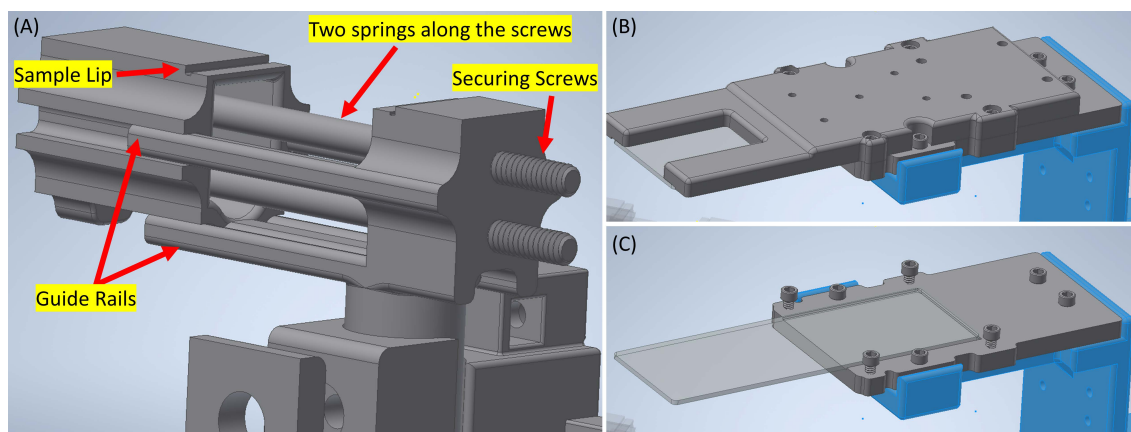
(A) The CAD of the final version of the clamping mechanism. We had this part machined and it worked quite well. Unlike the one shown in Fig. G.13(A,B), it allows for larger samples (up to 1 cm) to be clamped. The first version, in Fig. G.13(A,B), only worked with 5 mm long samples. The idea is to have two long screws connect the clamping mechanism together with a spring along each screw (not shown in CAD). The spring and screw combination keeps the two clamping mechanisms aligned and in tension. The screws are also fully threaded so the clamping mechanism can be brought all the way together or extended until the guide rails stop. Note: a spring with this compression/extension ratio must be selected to access this full range. (B) Top of the slide holder that secures the glass slide in place. (C) Bottom of the slide holder that secures the glass slide in place. Both the top and bottom are machined to have a groove for the glass slide to prevent it from moving.
